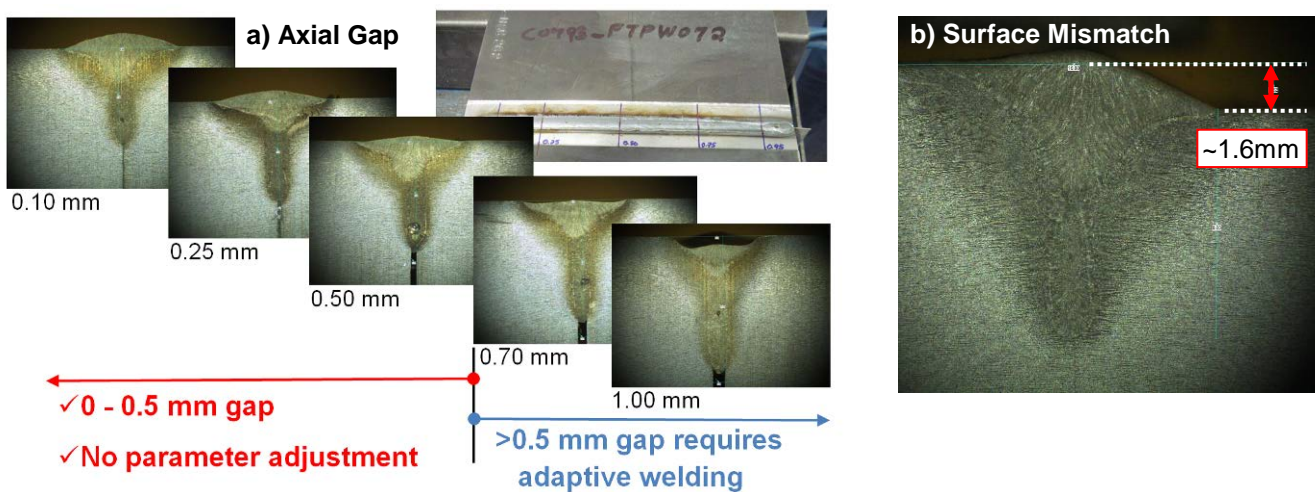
Joint tolerance for acceptable welds (a) Axial gap < 0.5mm (b) Surface mismatch < 1.6mm
